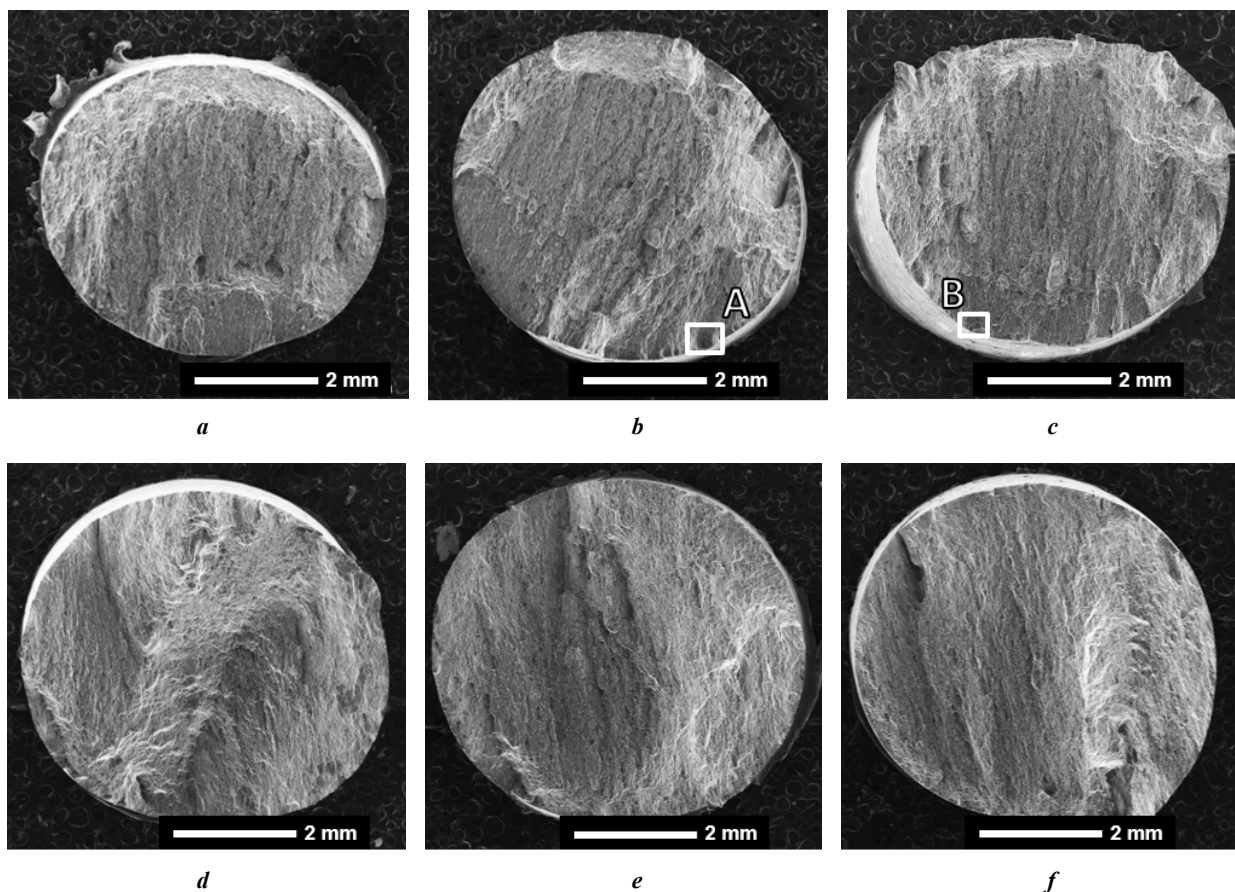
The appearance of the fracture surface of the AZ31 alloy specimens tensile- tested in air: a, d – in the reference state; b, e – after the pre-exposure to a corrosive medium; c, f – after the pre-exposure to a corrosive medium and the removal of corrosion products: a–c – at a low ($5 \cdot 10^{-6} \text{ s}^{-1}$) strain rate; d–f – at a high ($5 \cdot 10^{-4} \text{ s}^{-1}$) strain rate.
